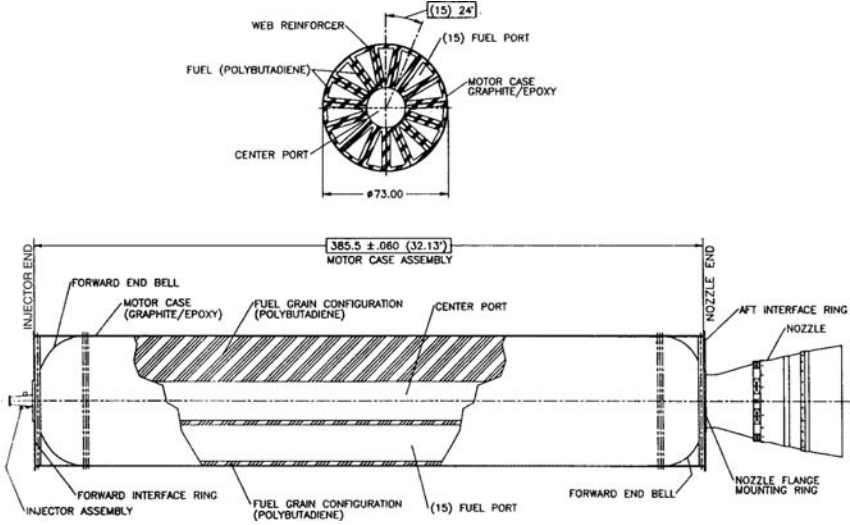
AMROC DM-01 motor assembly-250 Klb thrust.
